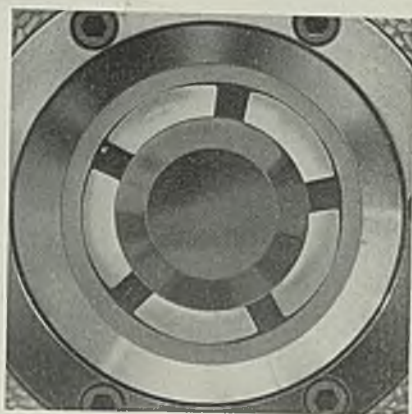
Closeup of bearing showing the five self-adjusting shoes
